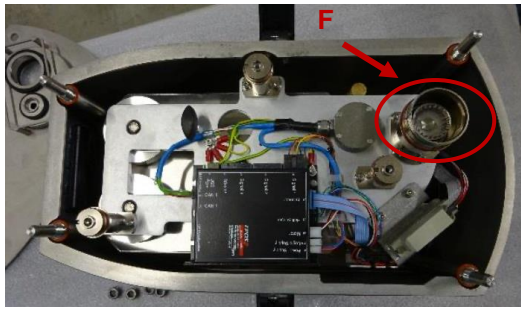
Gearbox being assembled on the weighing scale box; F – Gearbox [33].
